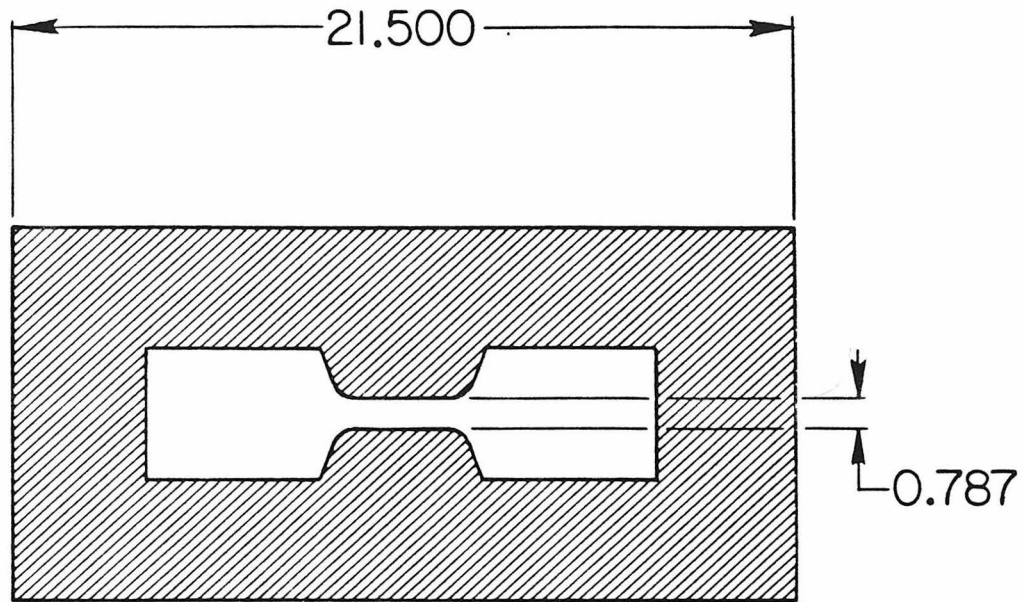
The drawing of the damping ring dipole magnet, showing the specially shaped pole tip pieces that provide the sextupole field component.
